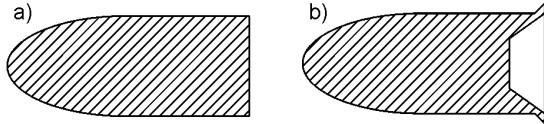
Cross-section view of the flameholder. a) Original design and b) modified design.
